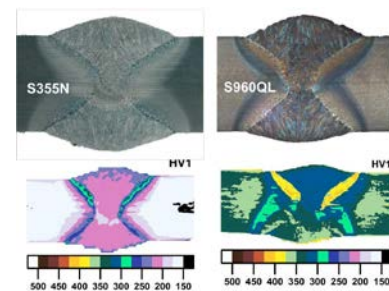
Macrographs of the investigated DV-butt welds.
